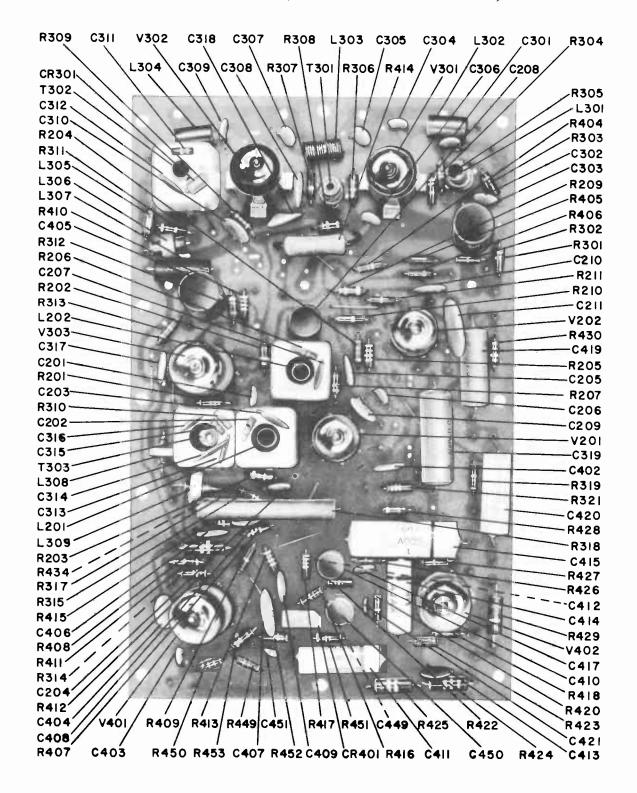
View of Components Side of Etched Circuit Board A7265-1. Location of Components Shown.
